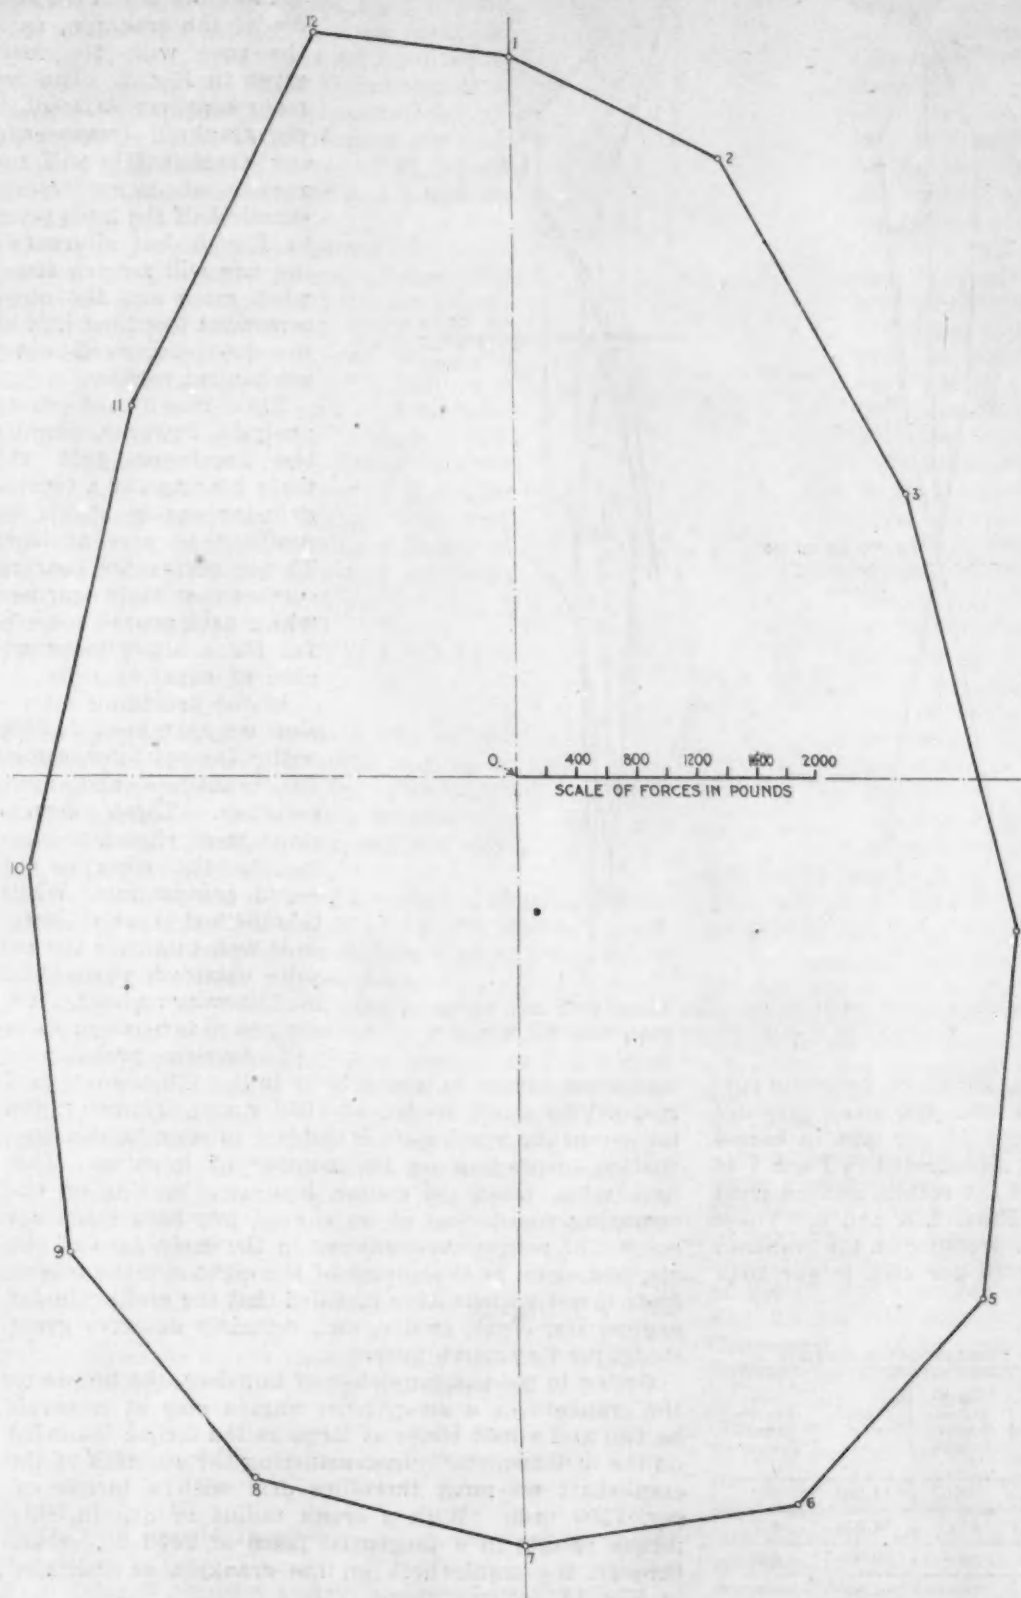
LOADS ON MAIN BEARINGS IV OF CRANKSHAFT WITHOUT BALANCE WEIGHTS
